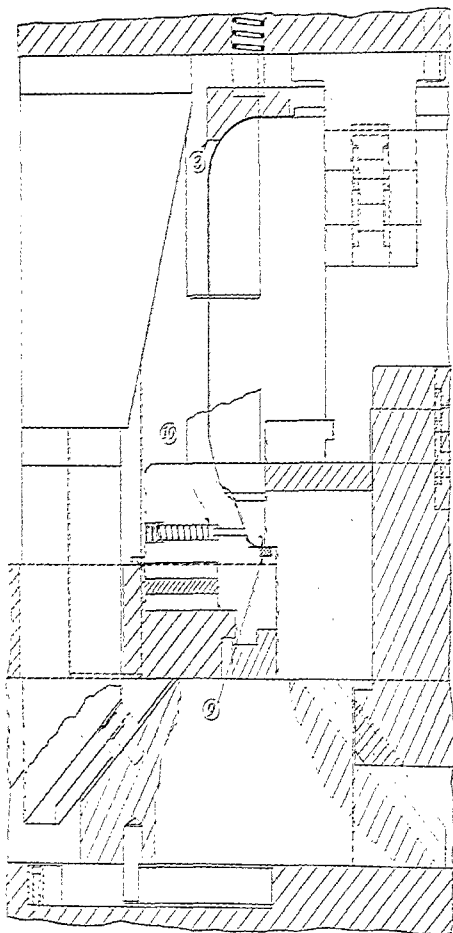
Plan view of cam die for perforating 1,080 holes. (Maytag Co.)
